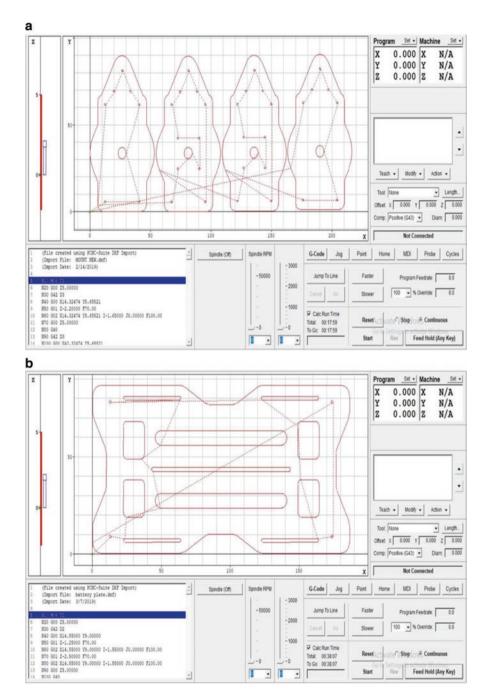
Plate design using the CNC router. (a) Motor mount plate design. (b) Battery plate design
